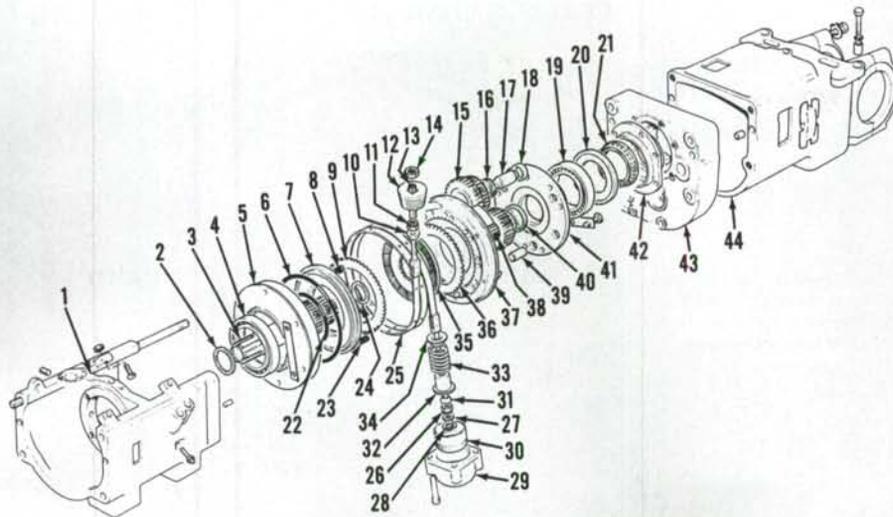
Exploded view of rear planetary assembly of power shift transmission. See Fig. 196 for view of front planetary assembly.
